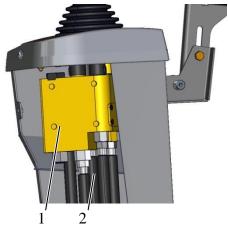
1 Guide valve 2 Hydraulic oil pipe
